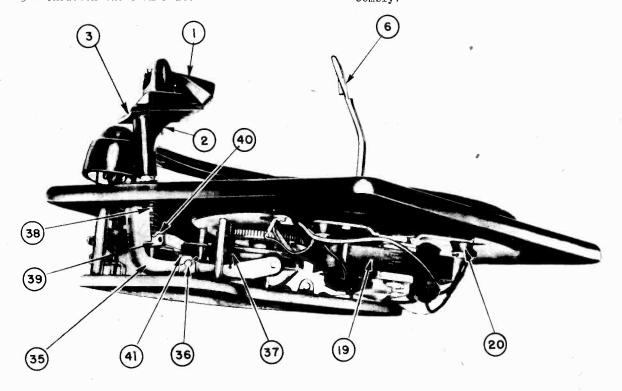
PARTS LOCATION -- LEFT SIDE VIEW
